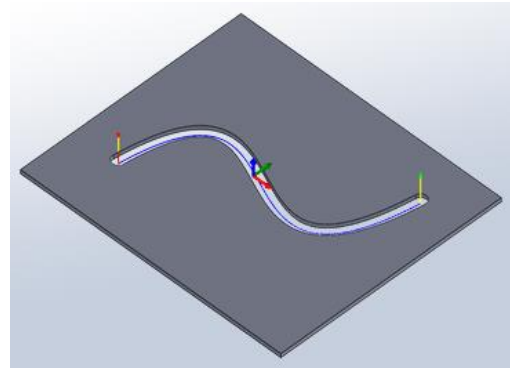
2D pocket machining (1cpro.cz)
